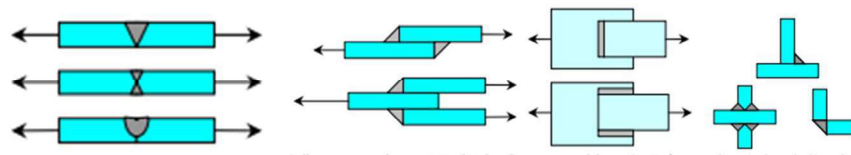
DIFFERENT TYPES OF WELDMENTS
